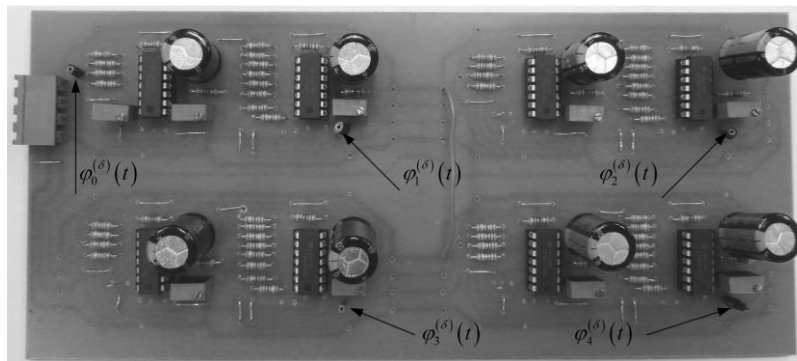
Improved almost orthogonal Legendre type filter - printed circuit board
